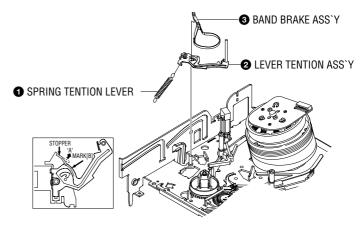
Lever Tension Ass'y, Band Brake Ass'y Removal
